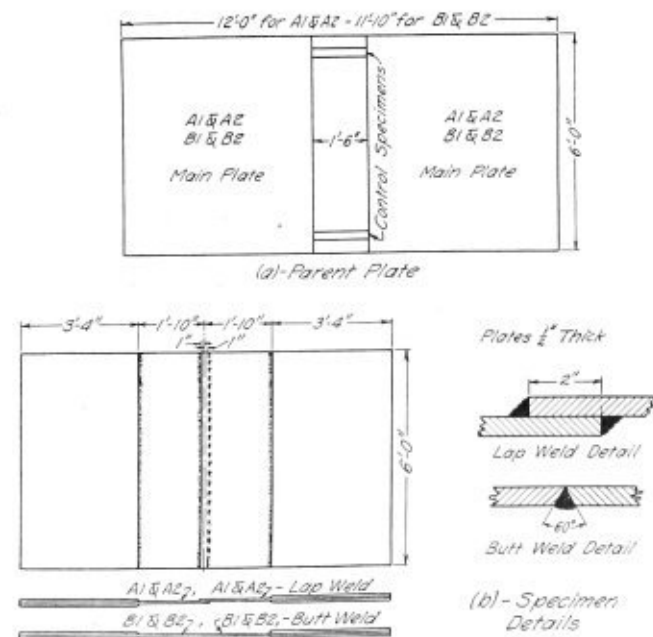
Parent plate and details of specimens for field weld tests
